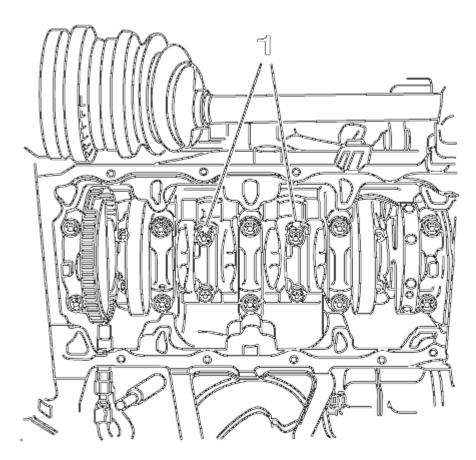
View Of Con-Rod Bearing Caps Courtesy of GENERAL MOTORS COMPANY
